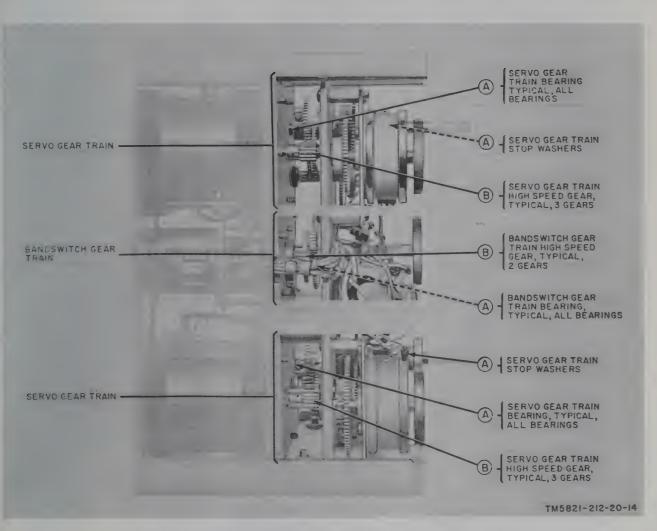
RF amplifier driver chassis gear trains, lubrication points.
